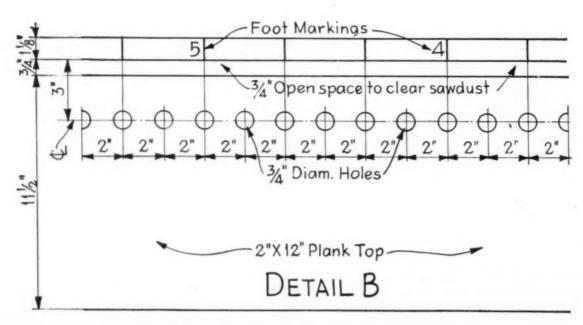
Enlargement of plan detail B, the area encircled in plan of Figure 2
